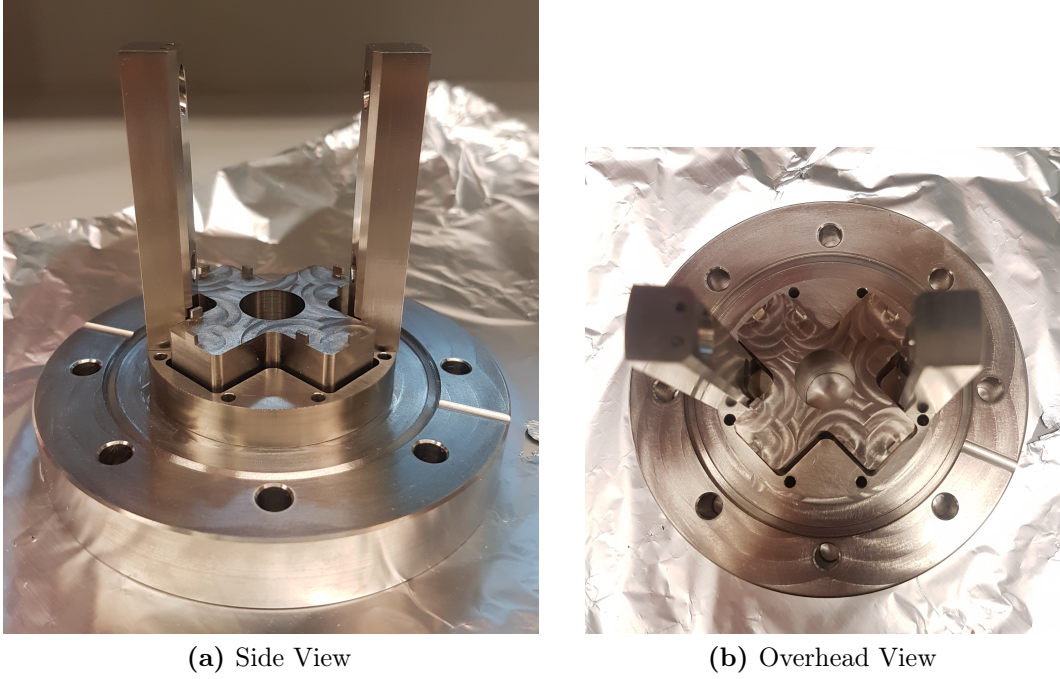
Cavity mounting structure placed onto prism mounting flange.
